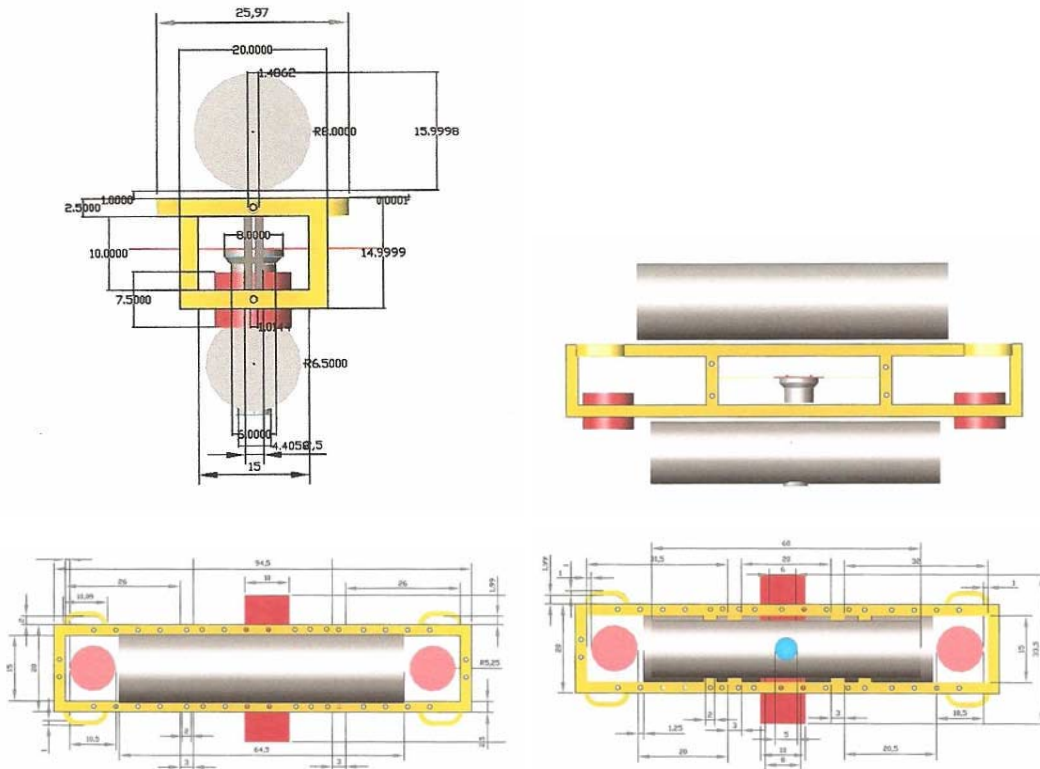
Drawings of Têtard: front, lateral, top and bottom.
